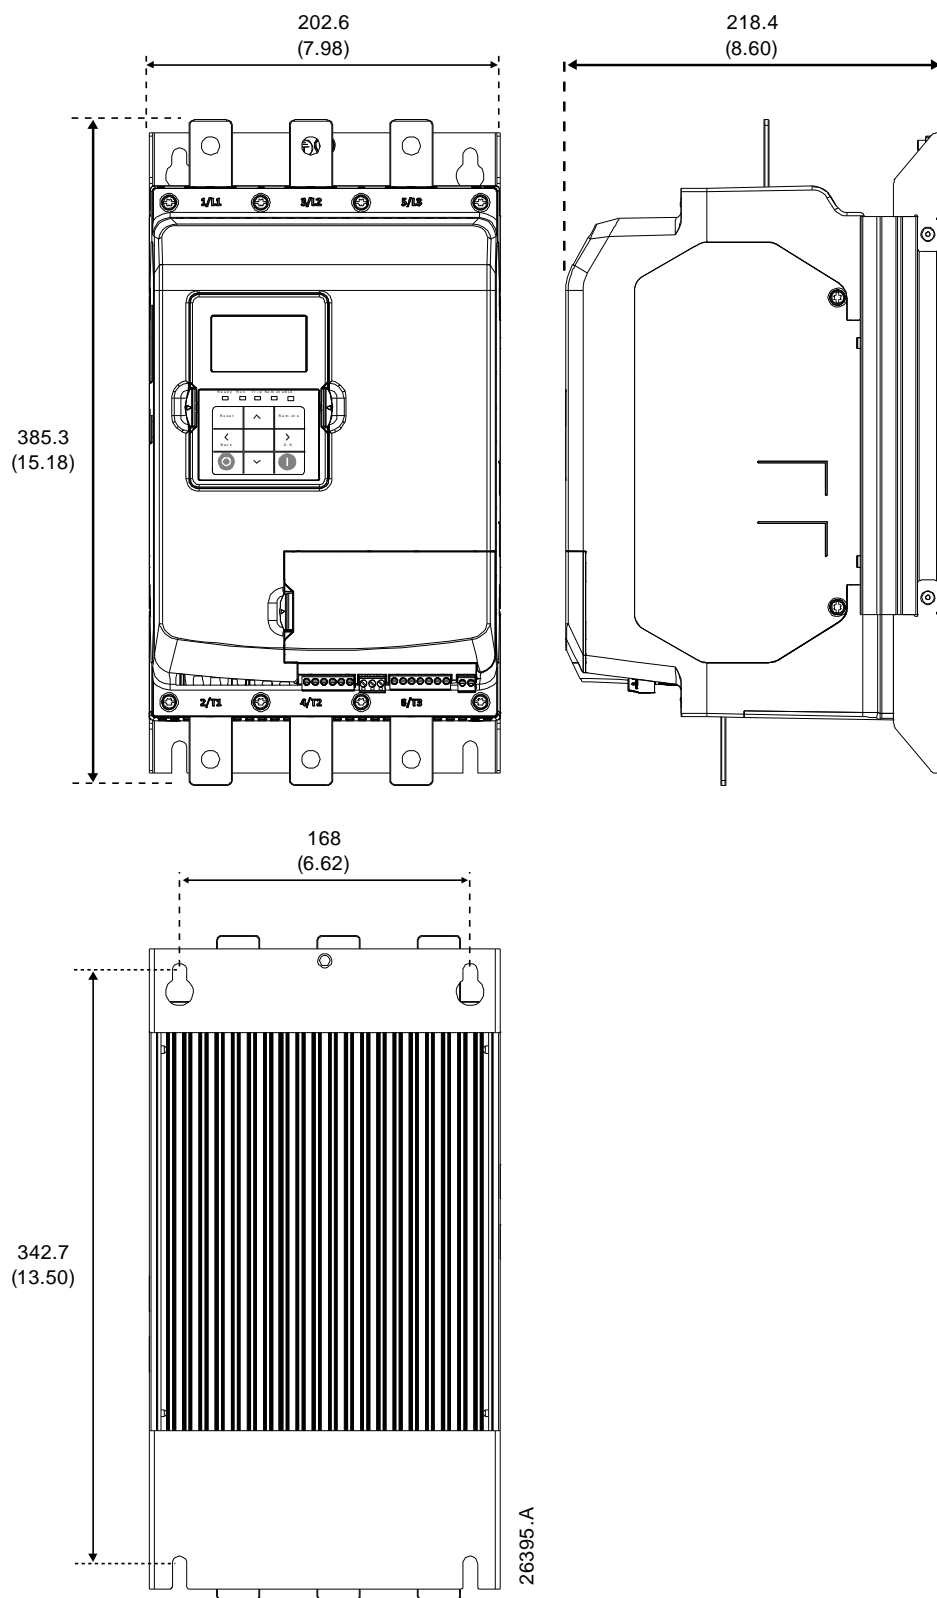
Frame size 3 (S711-34140...~ S711-34250...) dimensions
